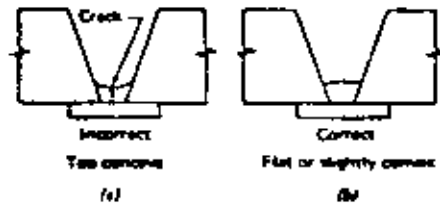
A concave root pass (a) may crack because tensile stresses exceed the strength of the weld metal. A slightly convex root pass bead (b) helps prevent cracking.
